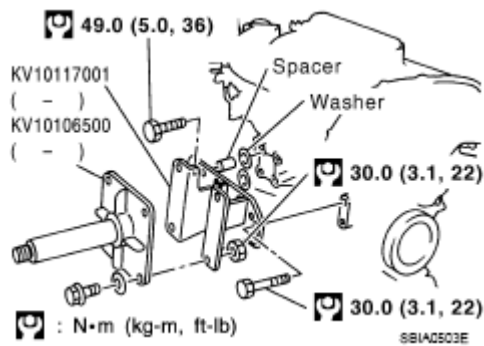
Identifying Sub-Attachment With Torque Specifications
